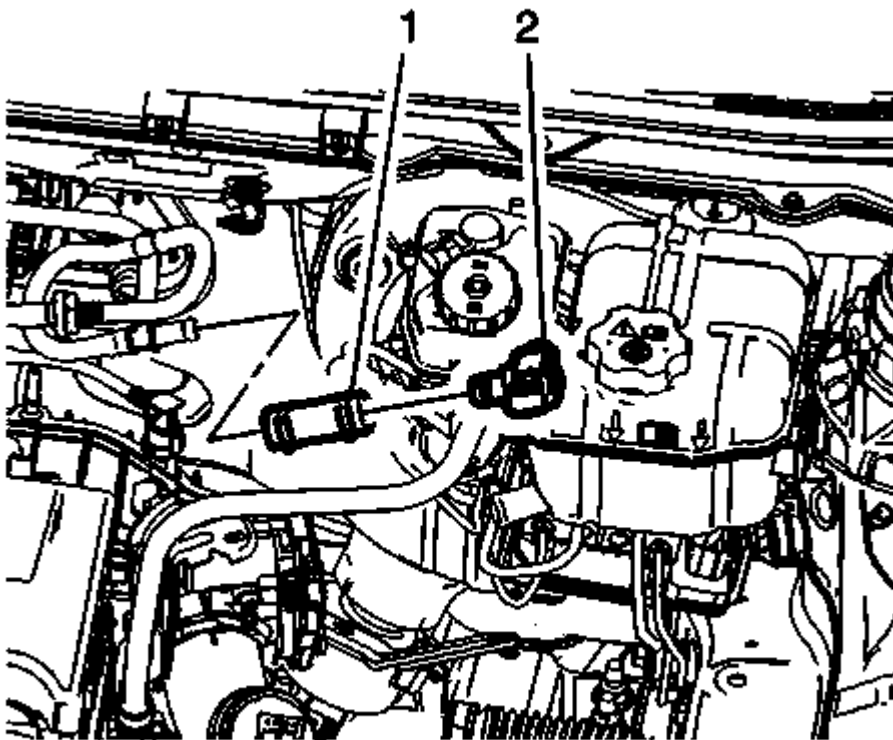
Power Brake Booster Vacuum Rear Pipe Hose
